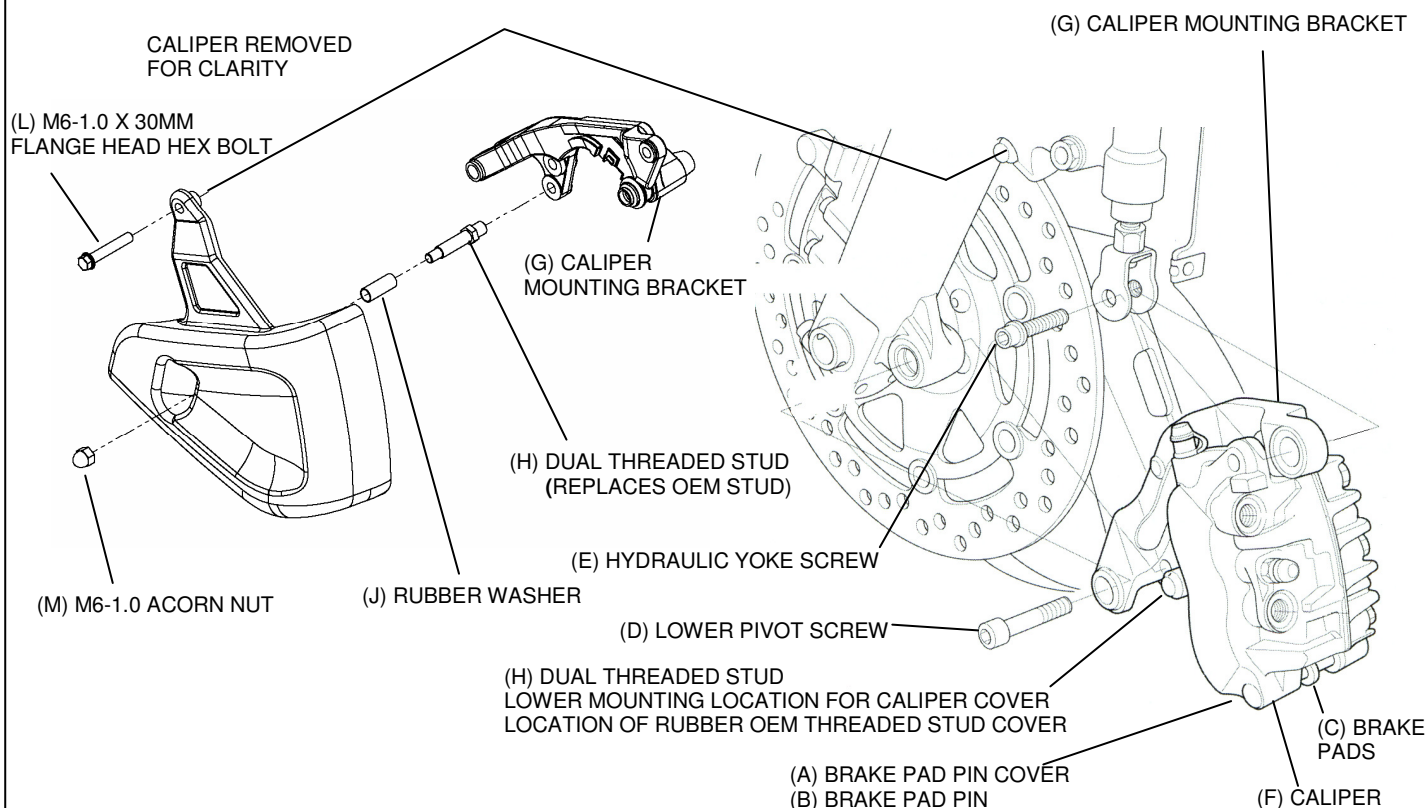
LEFT SIDE CALIPER REMOVAL AND CALIPER COVER INSTALLATION (RIGHT SIDE NOT SHOWN)
